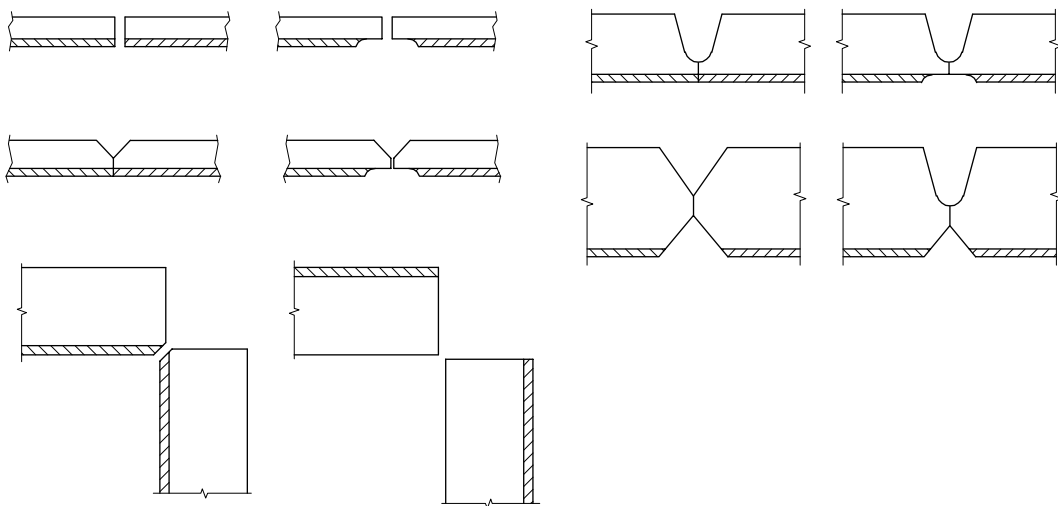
Joint design for welding of clad steel plate. (Adapted from Kearns, W.H. (ed.), *Welding Handbook, Vol.4, Metals and Their Weldability*, 7th edn., AWS, Miami, FL, 1982, Chapter 12.)
